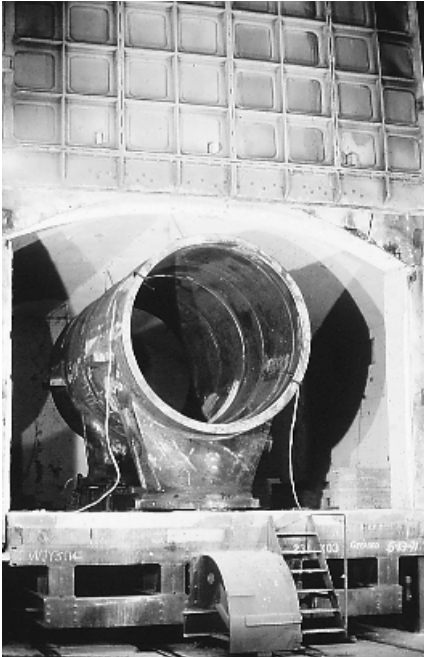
Heat treatment of a welded casing.
